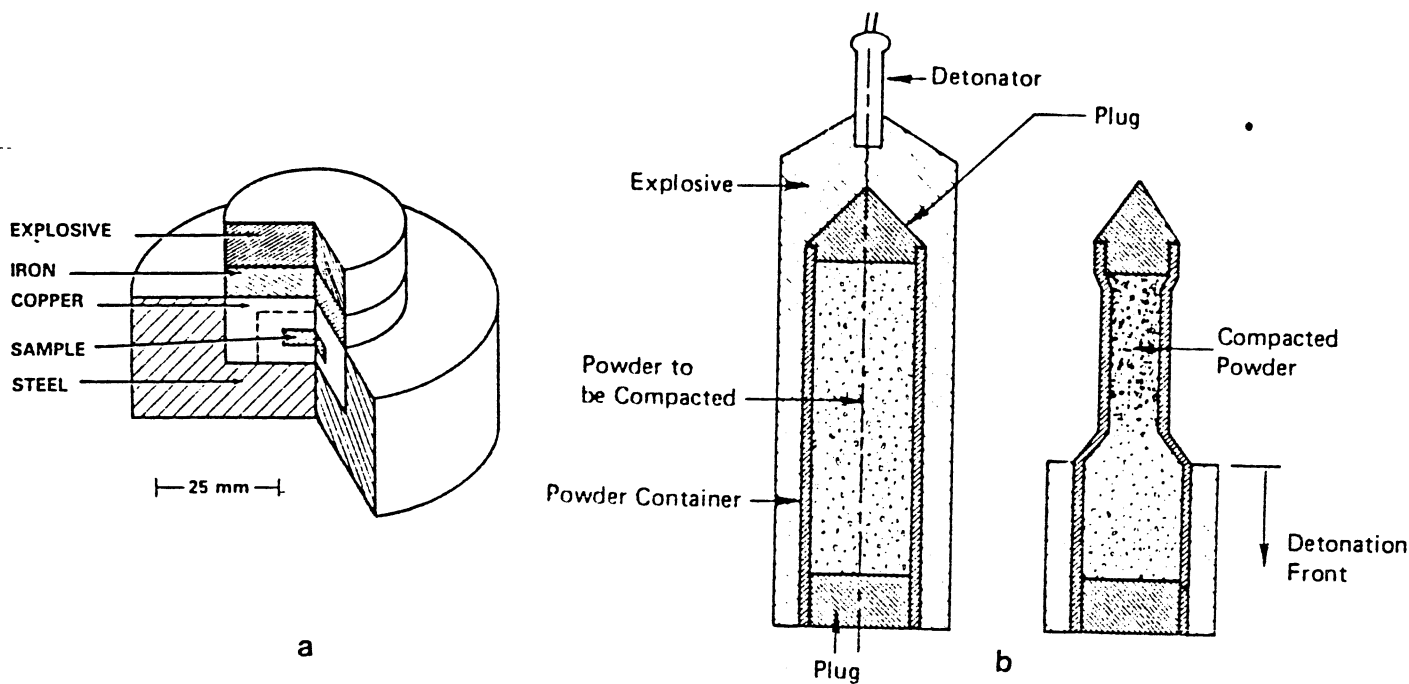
a) Section of calibrated Sandia Bear fixture with capsule containing powder in center.
